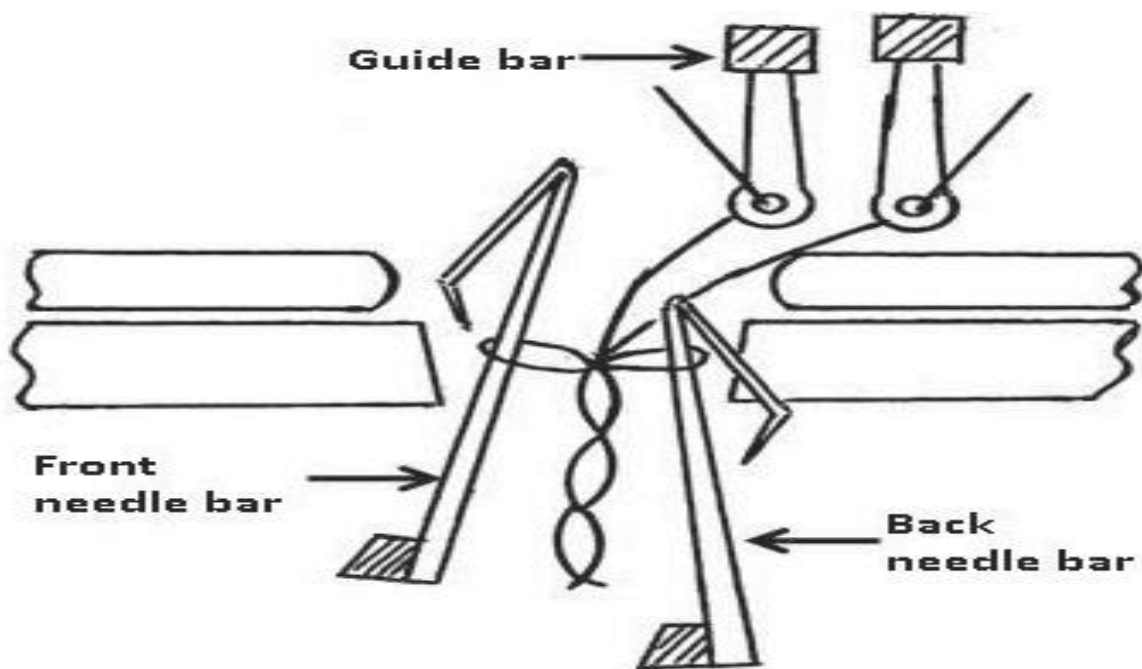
Knitting zone of the double needle bar Tricot machine.
